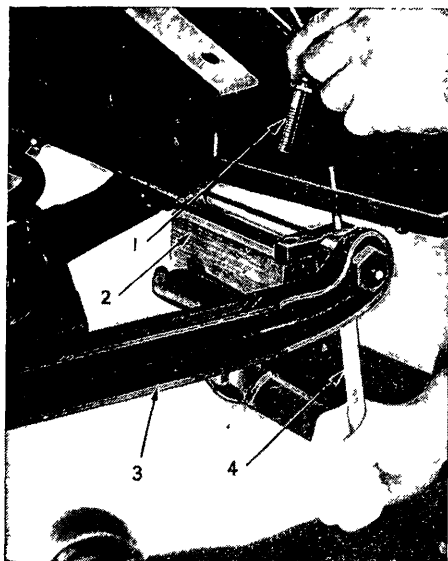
Removing or installing lower control arm, 1940-52. 1. Bolt. 2. Block. 3. Lower control arm. 4. Aligning drift
